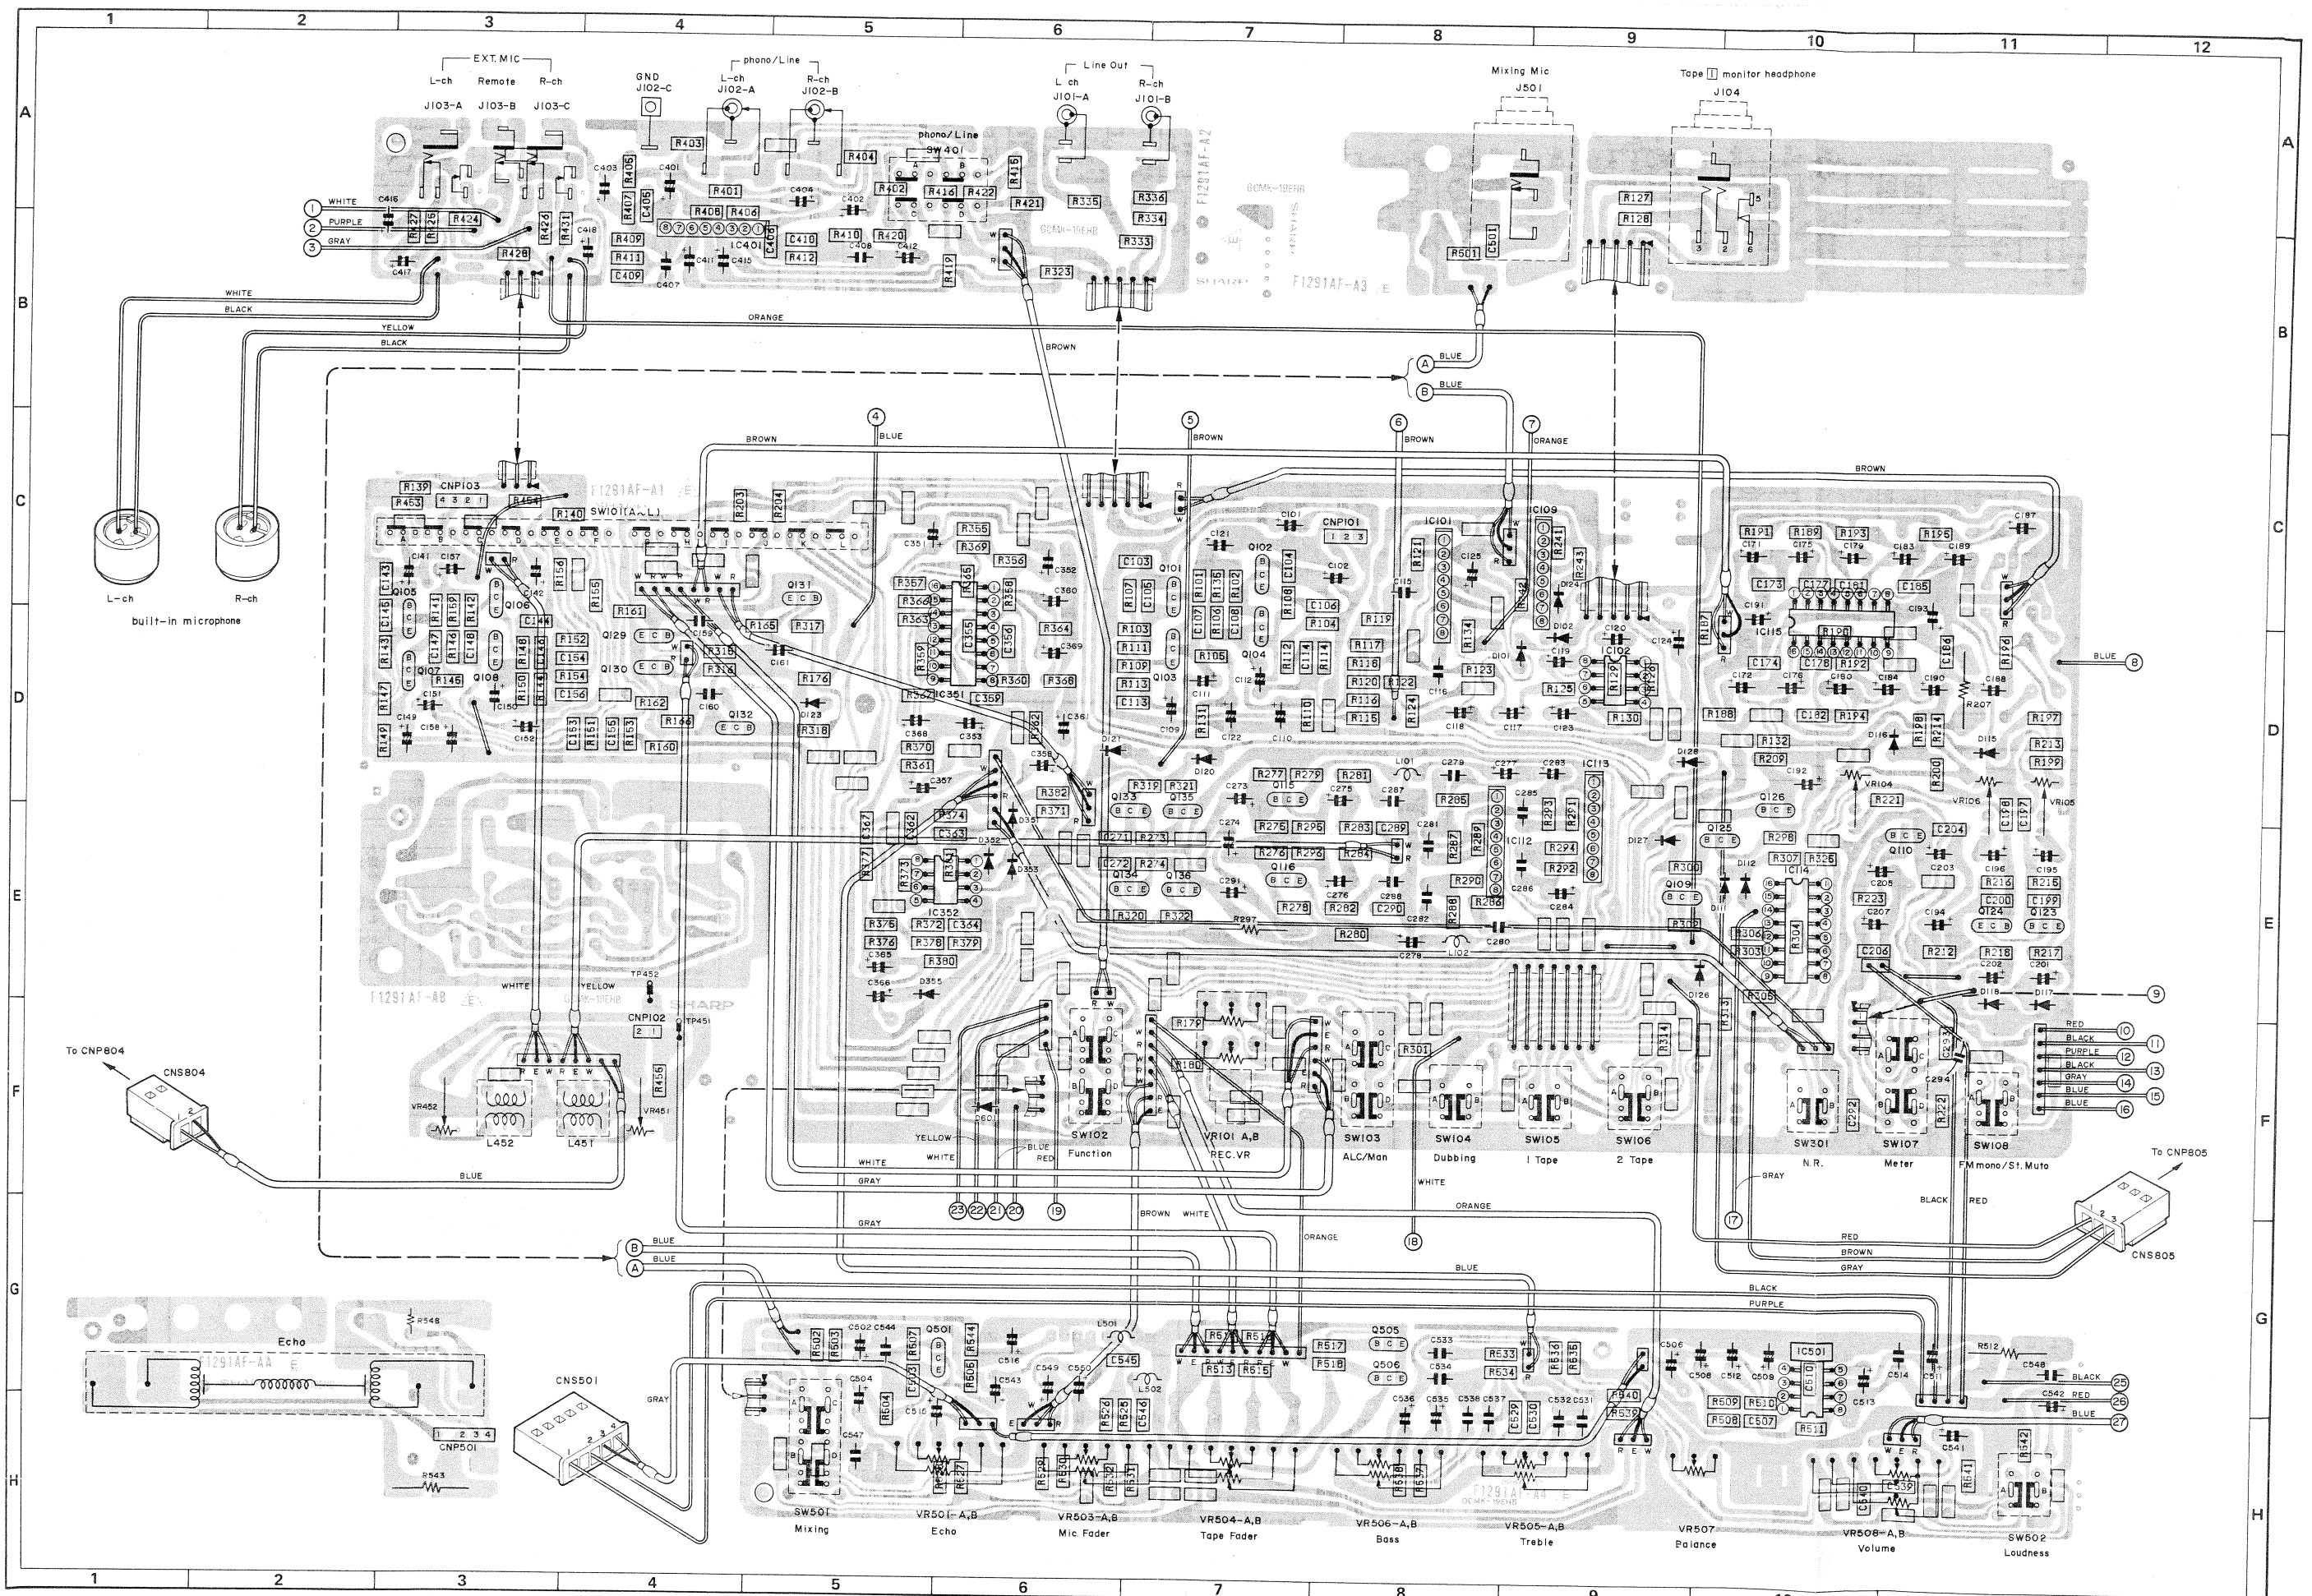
WIRING SIDE OF P.W. BOARD (1/6)
